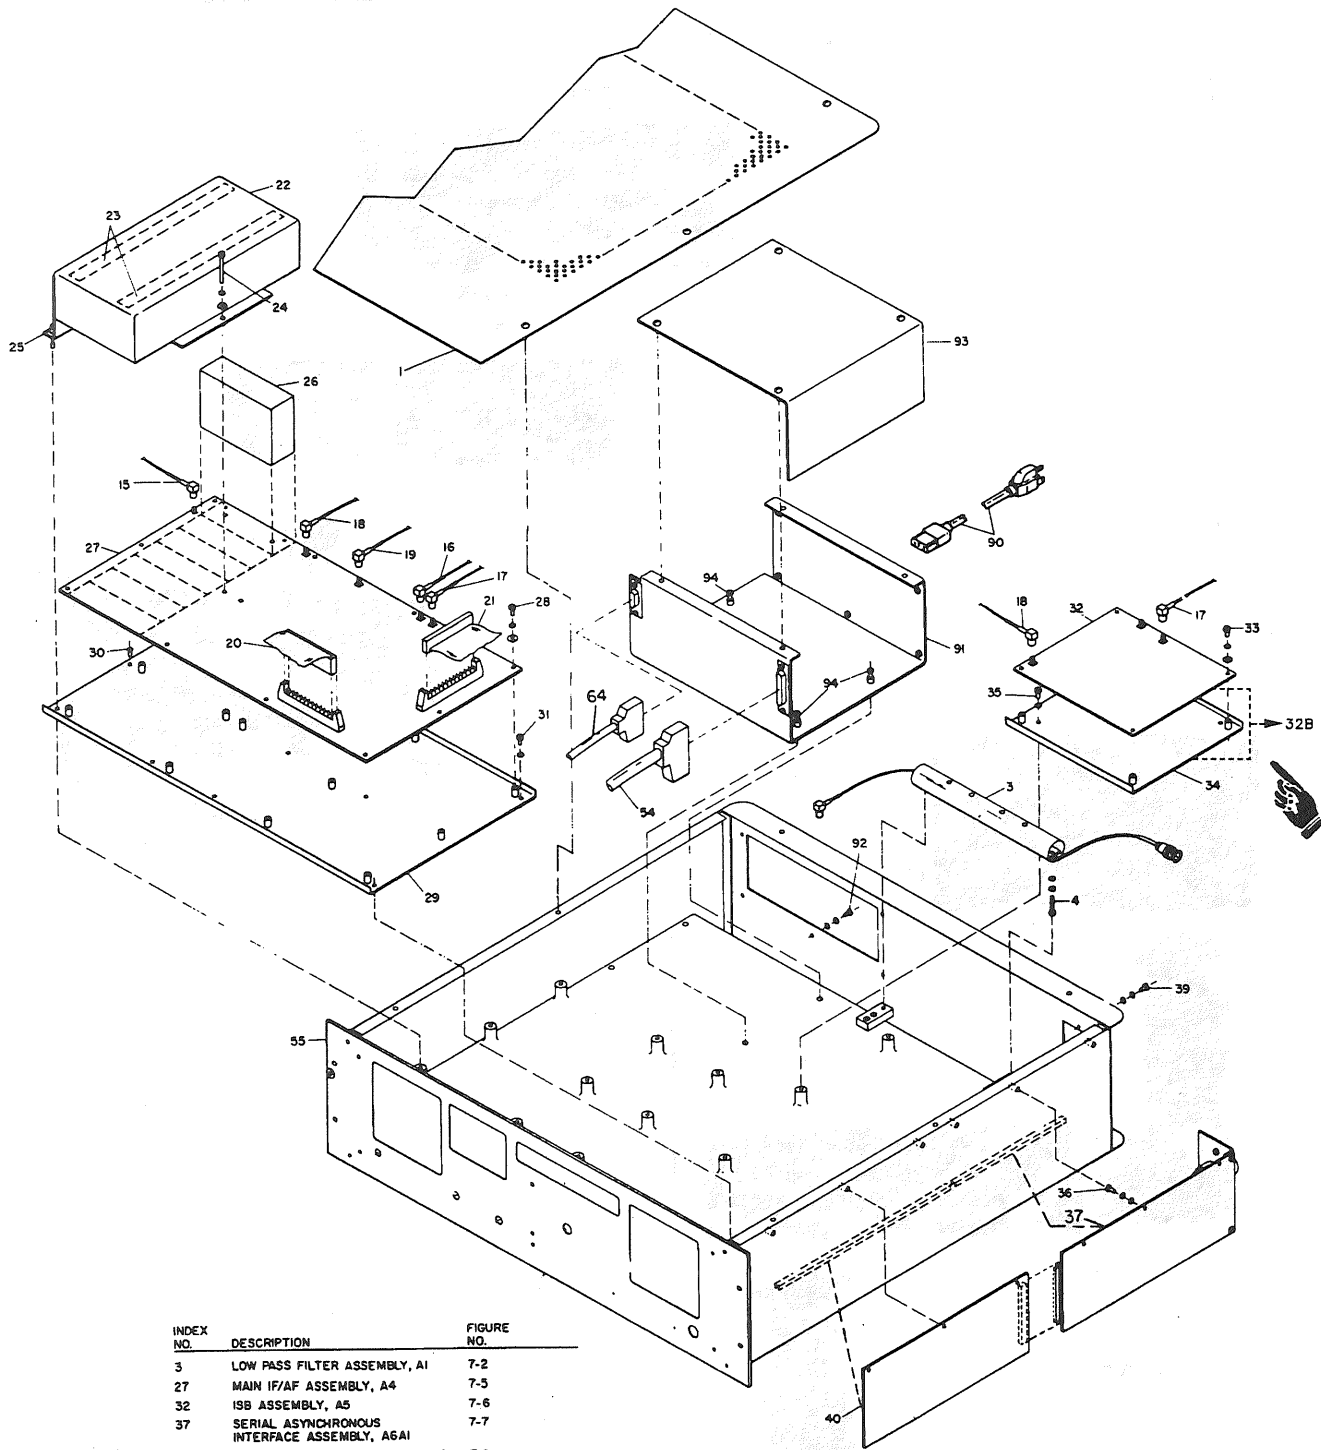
RECEIVER ASSEMBLY, RADIO R-2174(P)/URR
